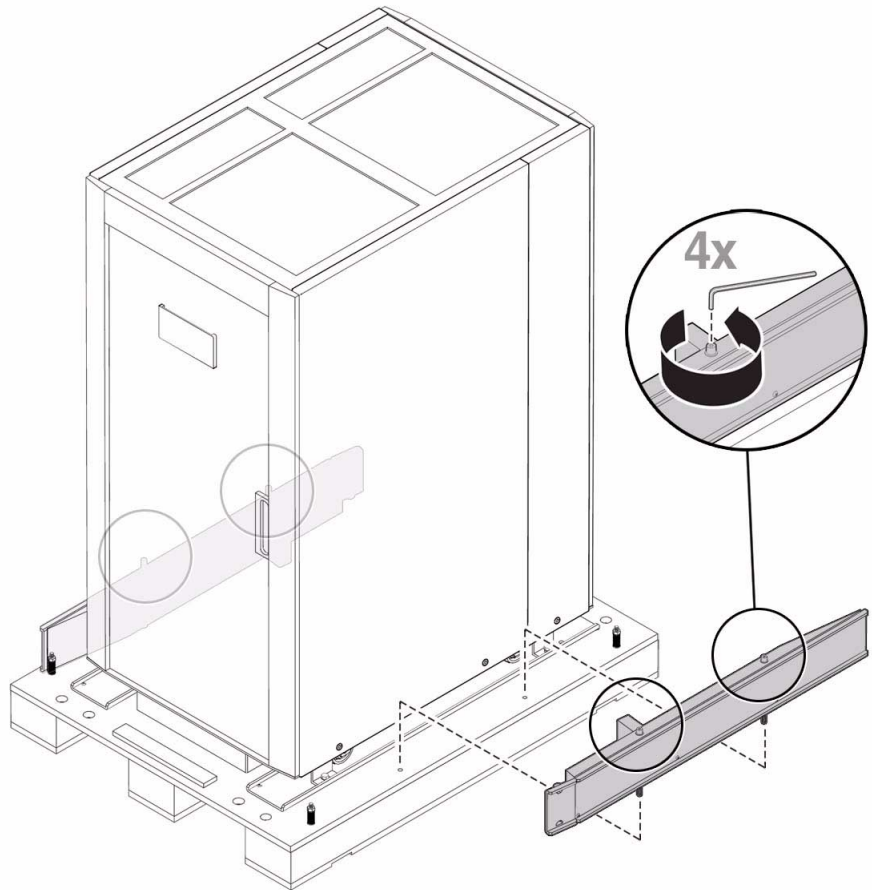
Exploded View of the M8000/M9000 Server Shipping Container
